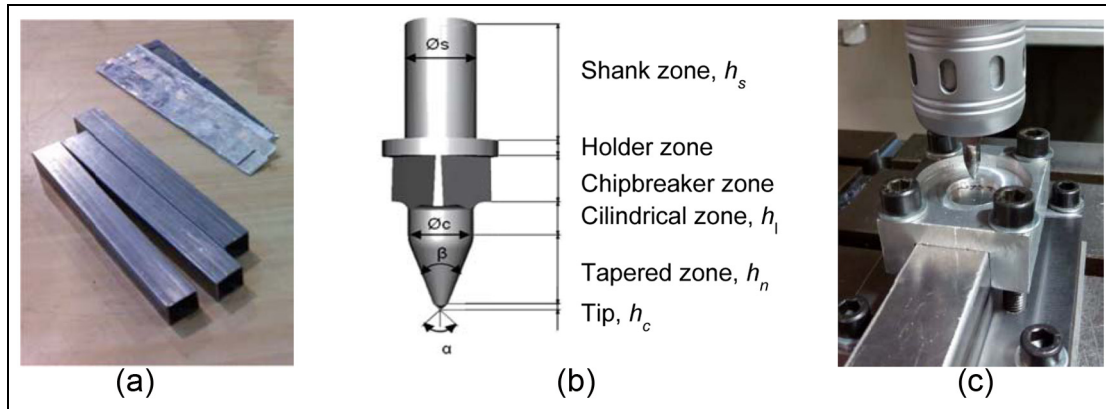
(a) Workpiece: sheets and tubes, (b) friction drilling tool, and (c) detail of the clamping fixture.
